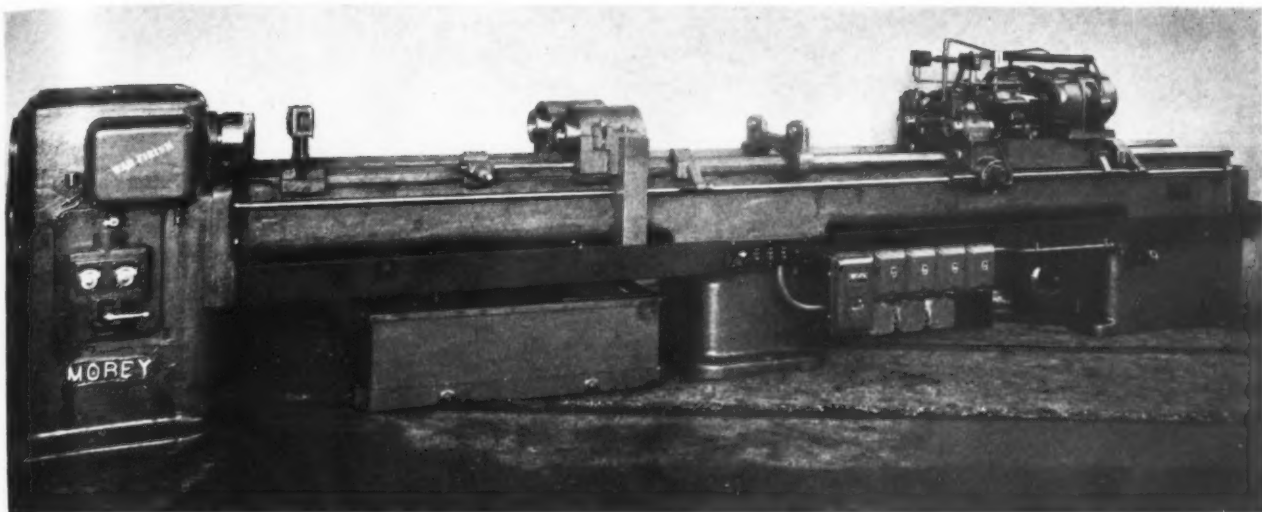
Morey No. 1 1/2 Duplex Deep-hole Drilling Machine
